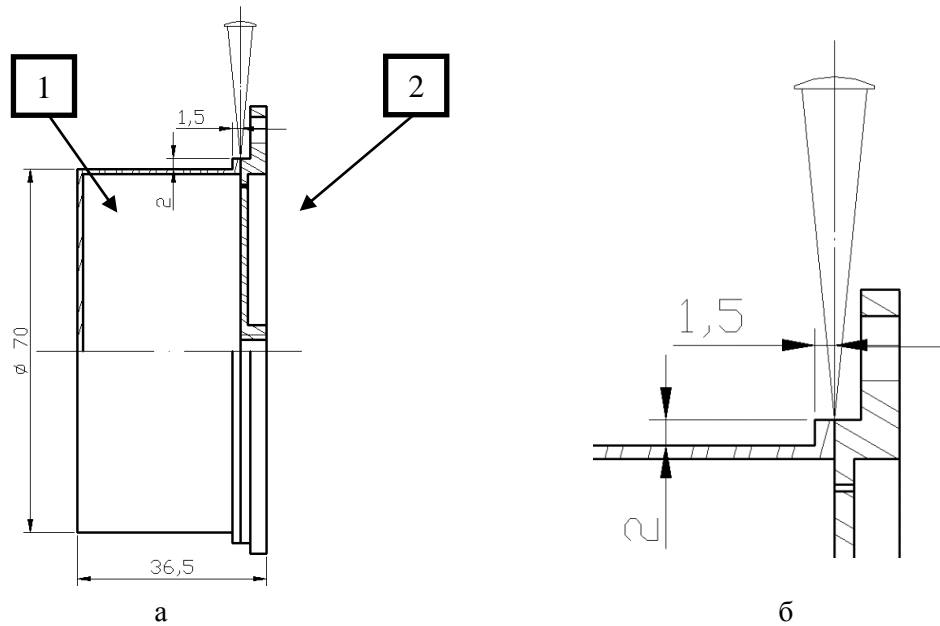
Welding scheme “cover with flanging”: (a) general view, (b) welding location, where 1 – cover, 2 – flange
